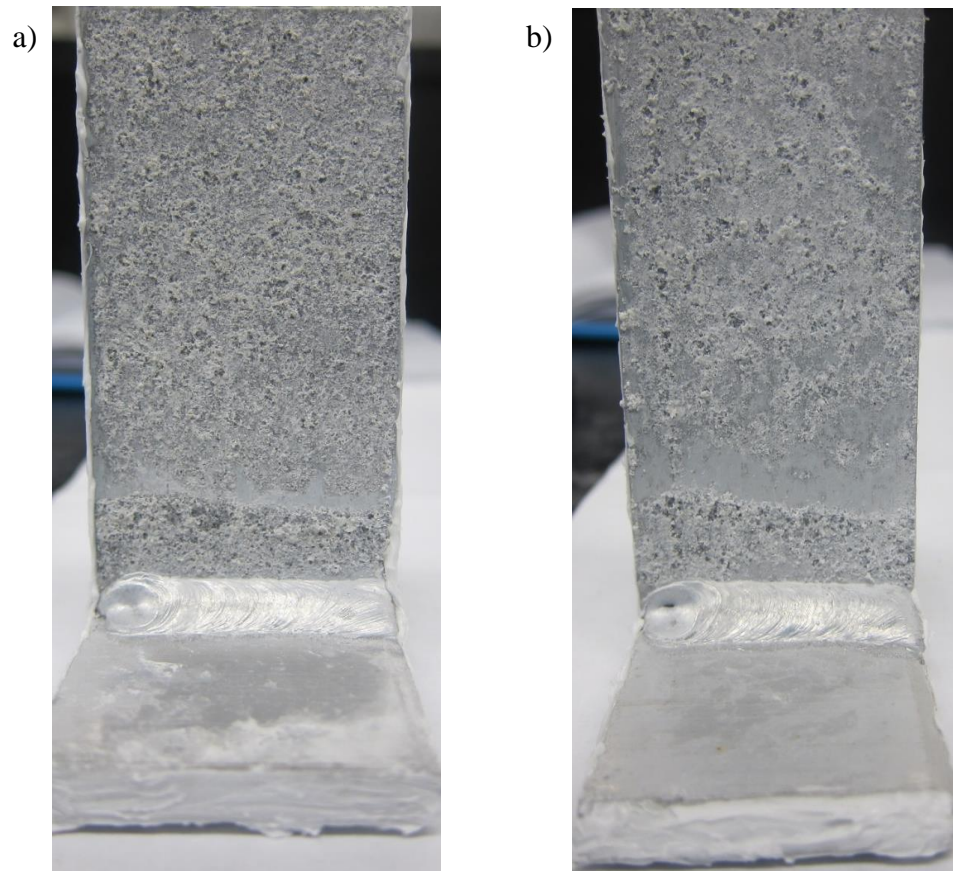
Duplicate samples of T-joint welded configuration E3 (ER5356/AA7003/L) in the as-welded T6+PB condition.
